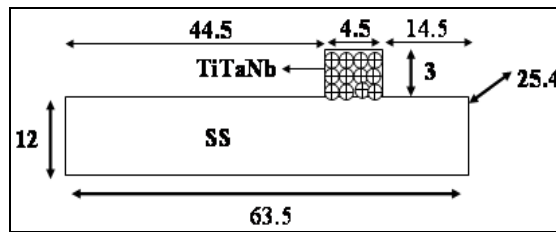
Schematic of specimen used for shear test (dimensions in mm)
